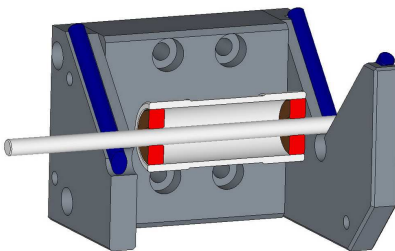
Support with sintered bearings of the same type as in the bearing unit under test
